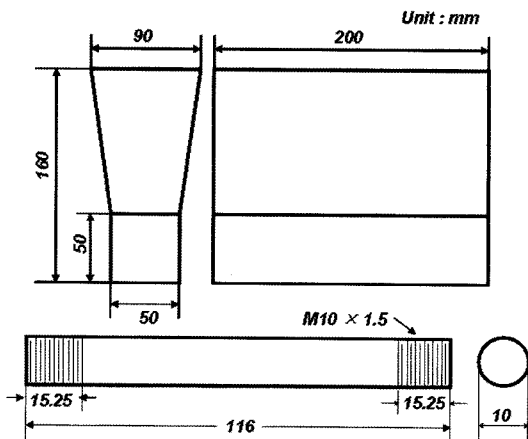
Schematic drawing of a wedge type Y-block casting and a tensile test specimen for thermo-mechanical Gleeble testing.
